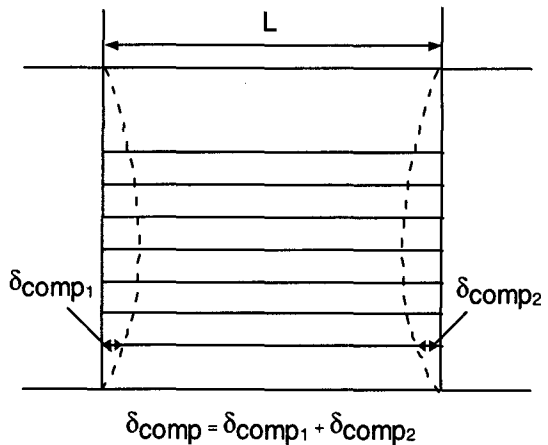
Schematic drawing for the calculation procedure of compressive displacement due to tube pressure
